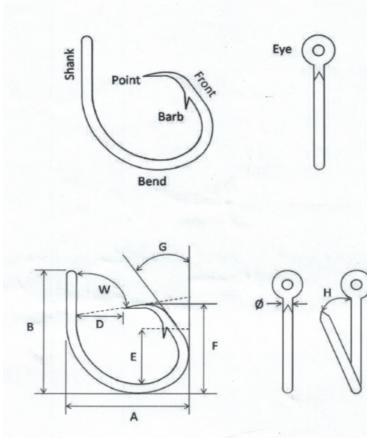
Basic component (upper panel) and measurements (lower) panel where: (A) width, (B) length, (D) gape, (E) throat, (F) front length, (W) point angle, (G) front angle, Ø is wire diameter (Lettering conforms to manufacturer conventions).
